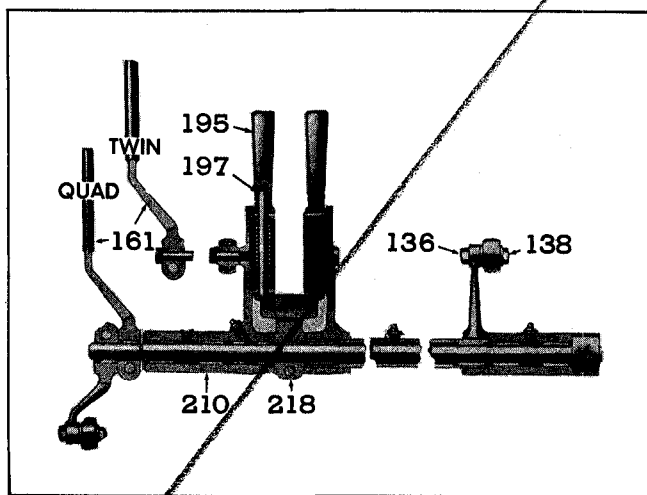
Throttle Control Shaft Assembly—Twin and Quad Units.
